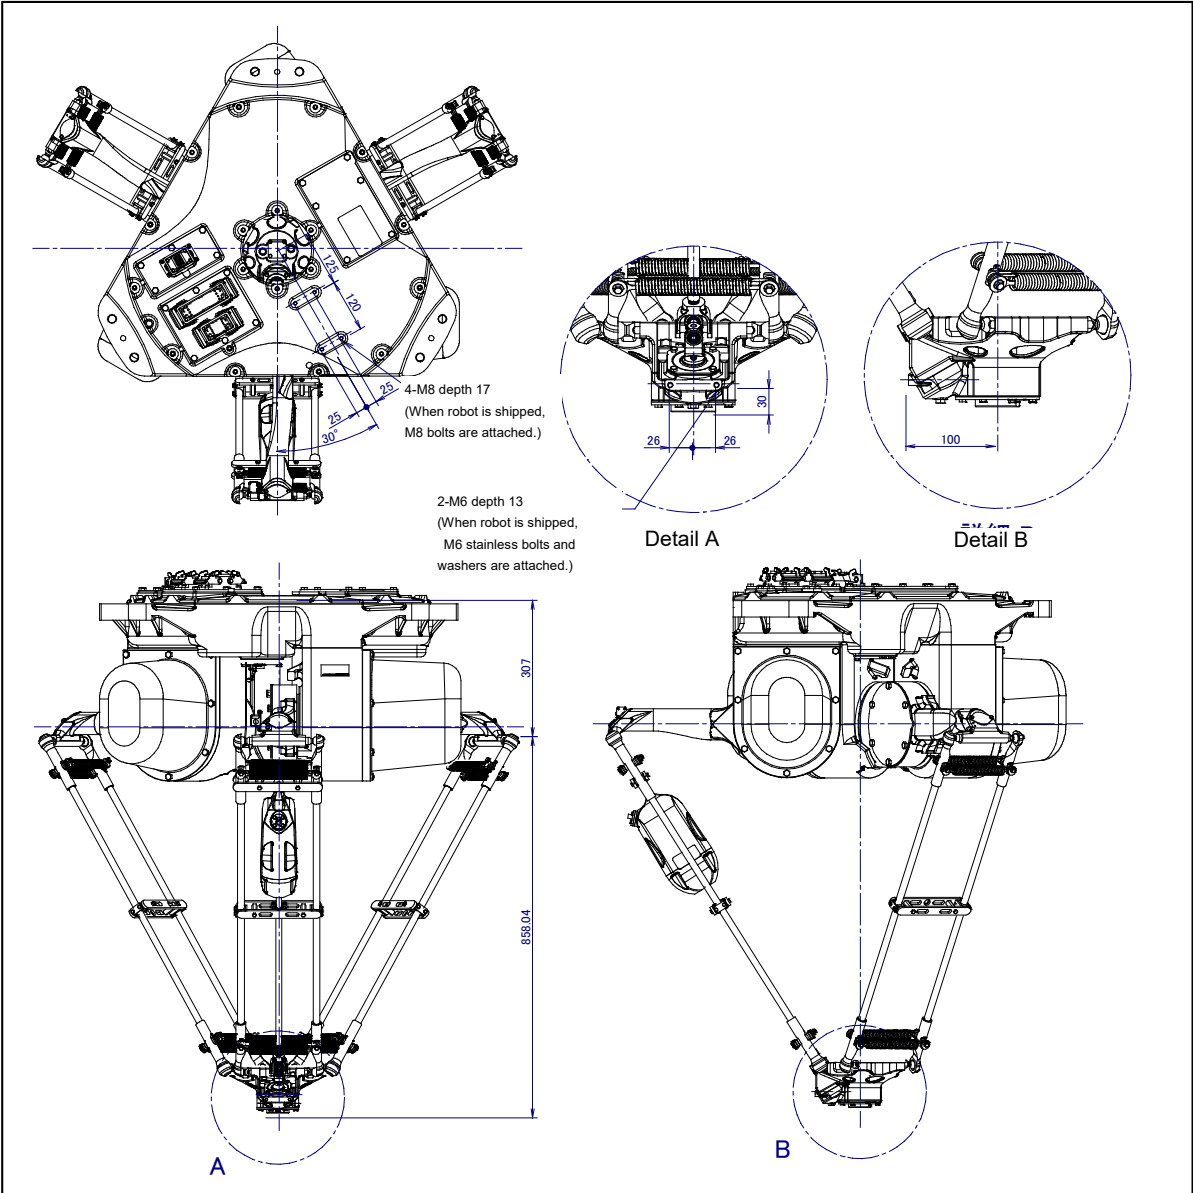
(b) Equipment mounting faces (M-3iA/6A)
